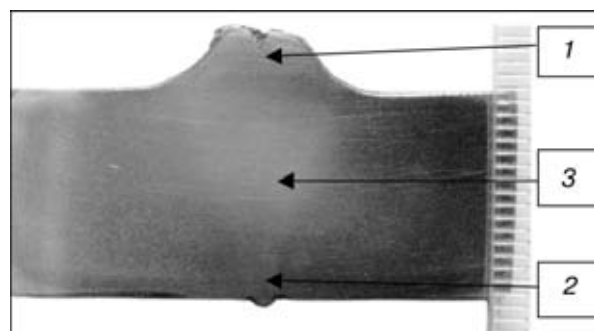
Macrosection of welded joint of pipe ($\delta = 16$ mm): 1-3 — regions which were used for metallographic examination
